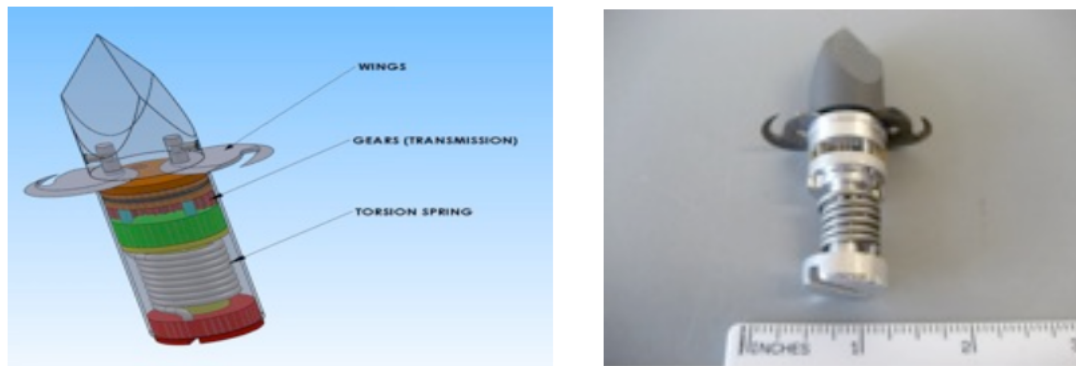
The CAD presentation of the anchoring wing attachment (left image) and the actual prototype without casing (right image). The anchoring wings are shown deployed after a torsion spring via gearing has swung the metal wings perpendicular to the pointed tag tip. The anchoring wing tip would be screwed to the anterior end of an implantable tag.
